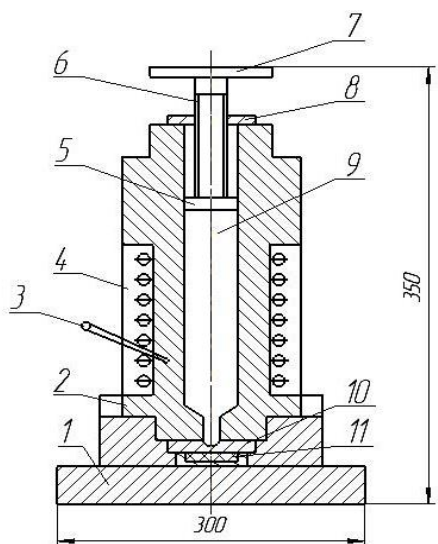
Scheme of the device for molding composites under pressure: 1 - base; 2 - body; 3 – thermocouple; 4 - heater; 5 - cylindrical pusher with plasticator; 6 - stock; 7 - flywheel; 8 - threaded cover; 9 - melt accumulator; 10 - mold; 11 - mold cavity
